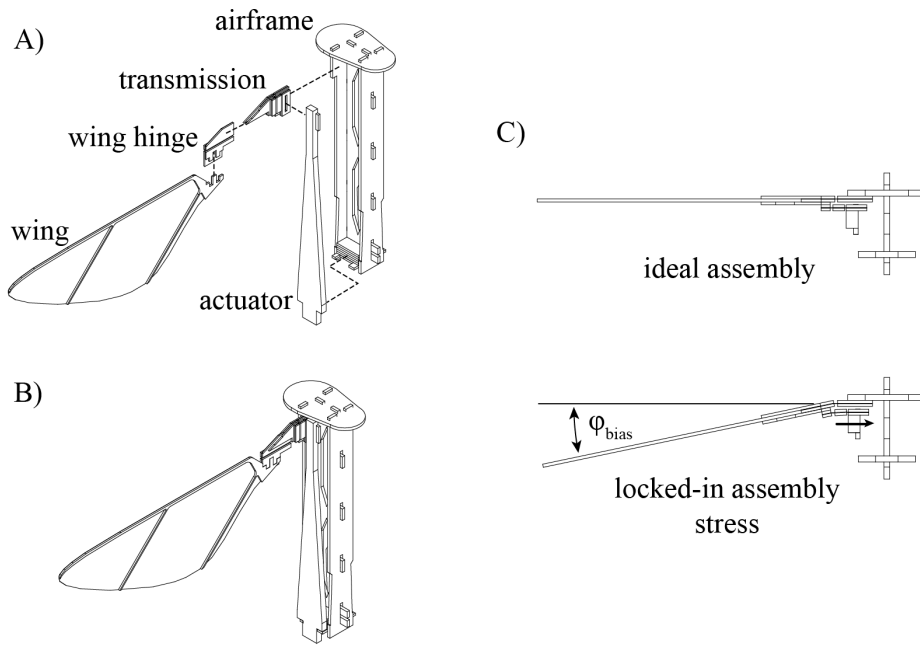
A) Exploded assembly of one side of the dual actuator bee, identifying the various parts. B) The fully assembled vehicle body. C) Top-view of the assembly. If locked-in stress is present in the wing drive assembly, the resting position of the wing will be off-center, resulting in pitch torque bias in the vehicle. ϕ_{bias} is the wing bias angle.
